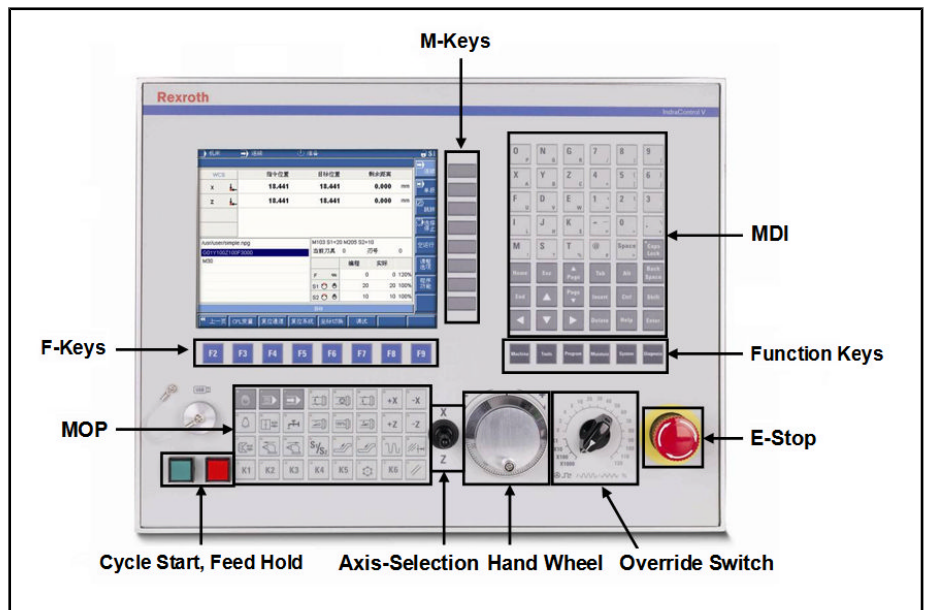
Keyboard layout on the HMI operator panel VDP 80.1, CNC turning
